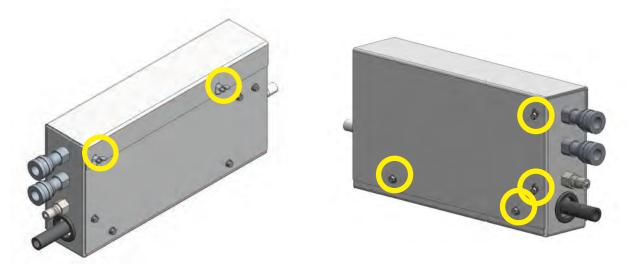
Remove Wing Nuts, Screws and Washers from QC Dash Box
